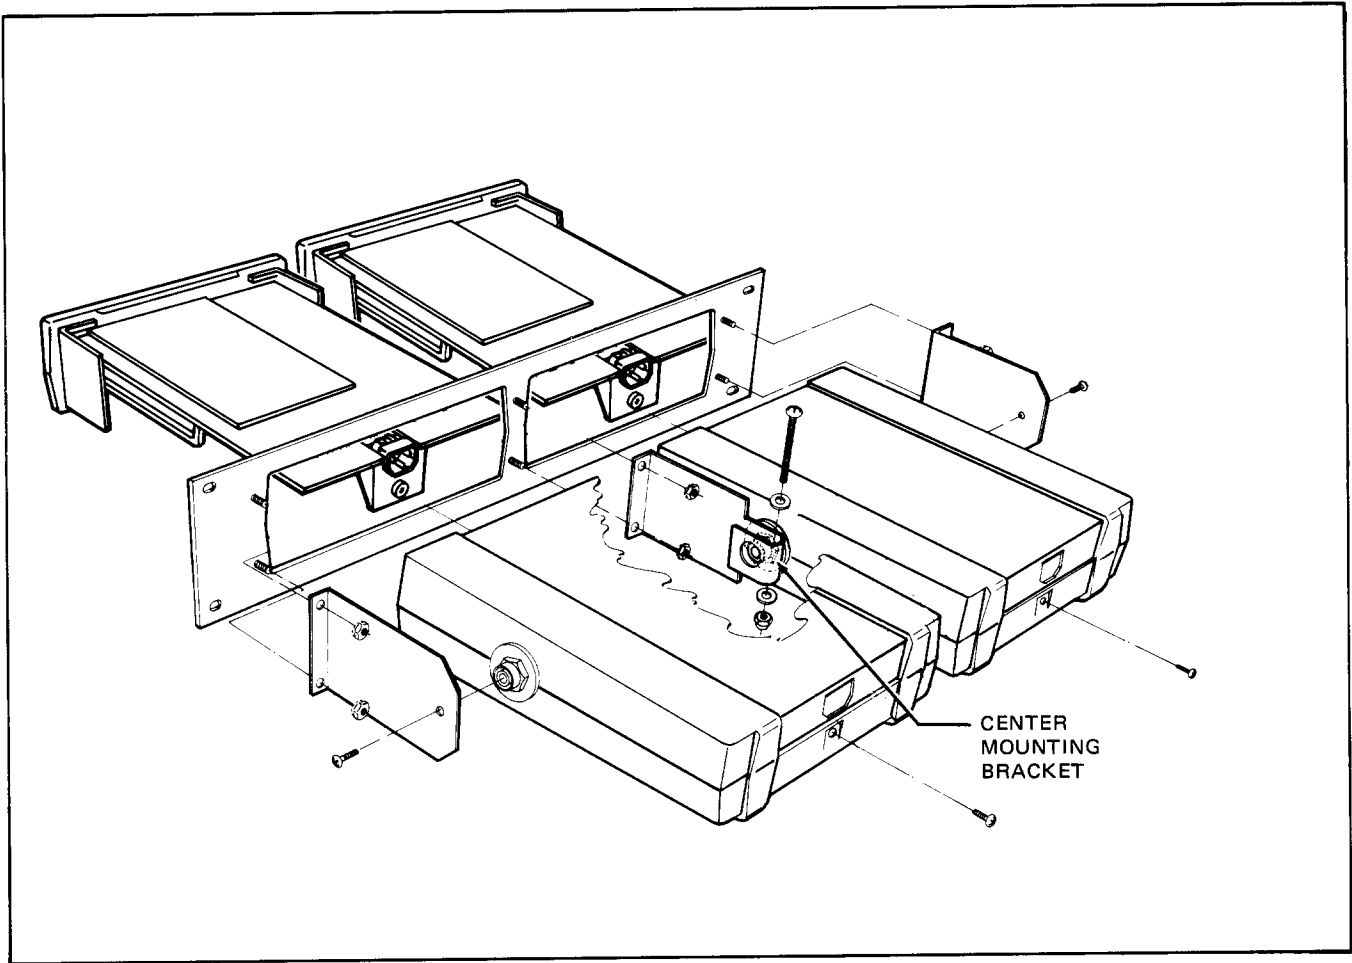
Rack Mounting Kit, Side-by-Side Mounting
